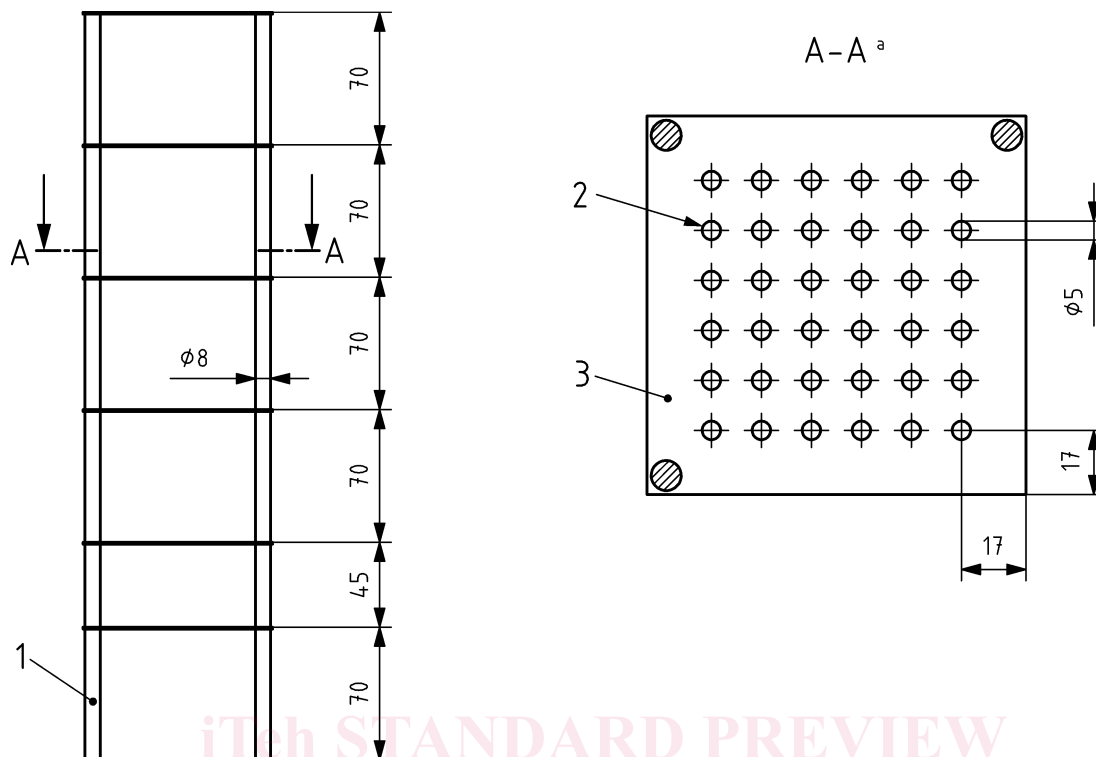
Schematic diagram and dimensions of typical pressure vessel
